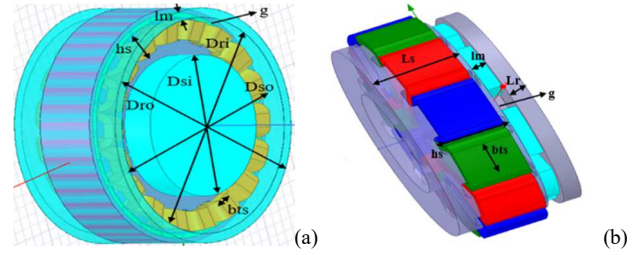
Geometric view of Hub BLDC motor parameter (a), Geometric view of AF BLDC motor parameters (b).
